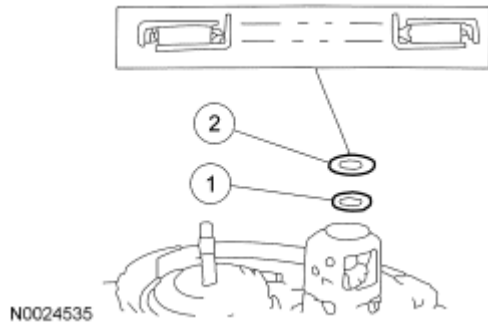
No. 14 Differential Bearing Shim & No. 15 Differential Bearing
